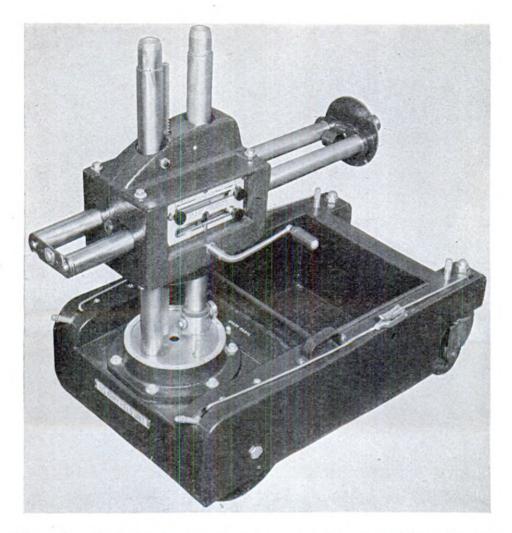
Chassis, lower mast section, cross-arm carriage, part of Chest MD X-1, old type, item No. 9609005.
